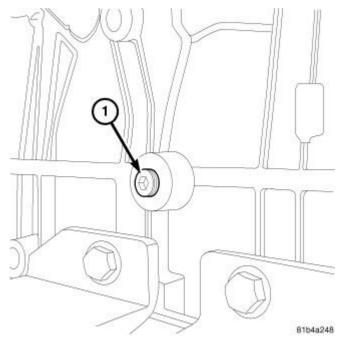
Crank Lock Plug Location Courtesy of CHRYSLER LLC
